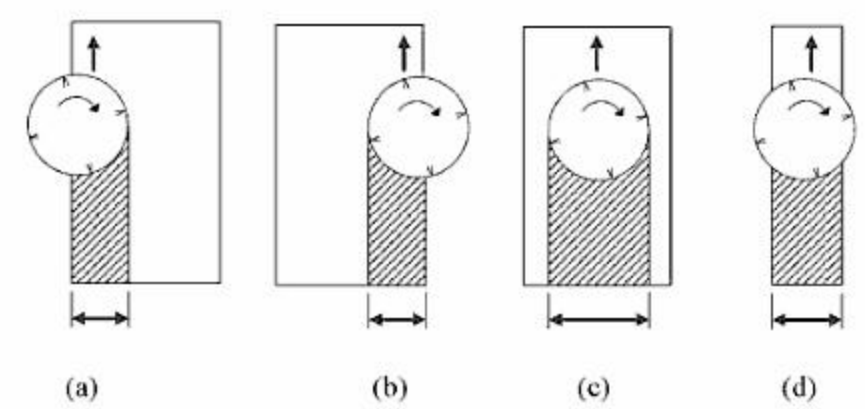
Milling types: a. Climb milling (down milling); b. Conventional milling (up milling); c. Slotting (channel cutting); d. Centre cutting
